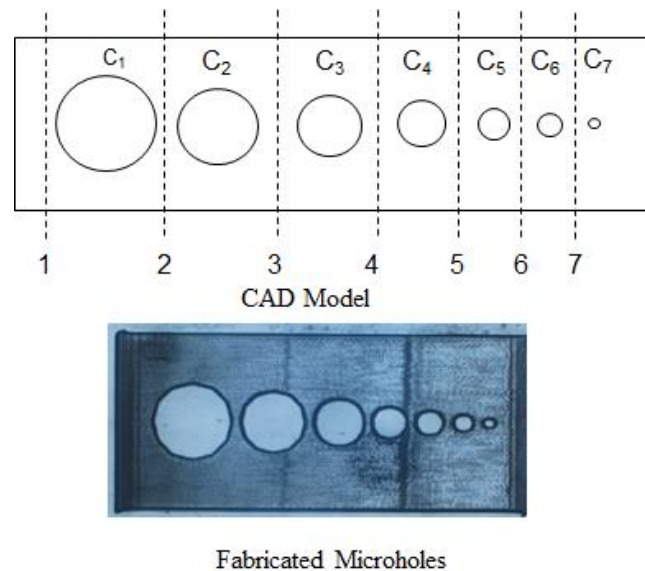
CAD drawing and optical microscope images of the micro-holes.
